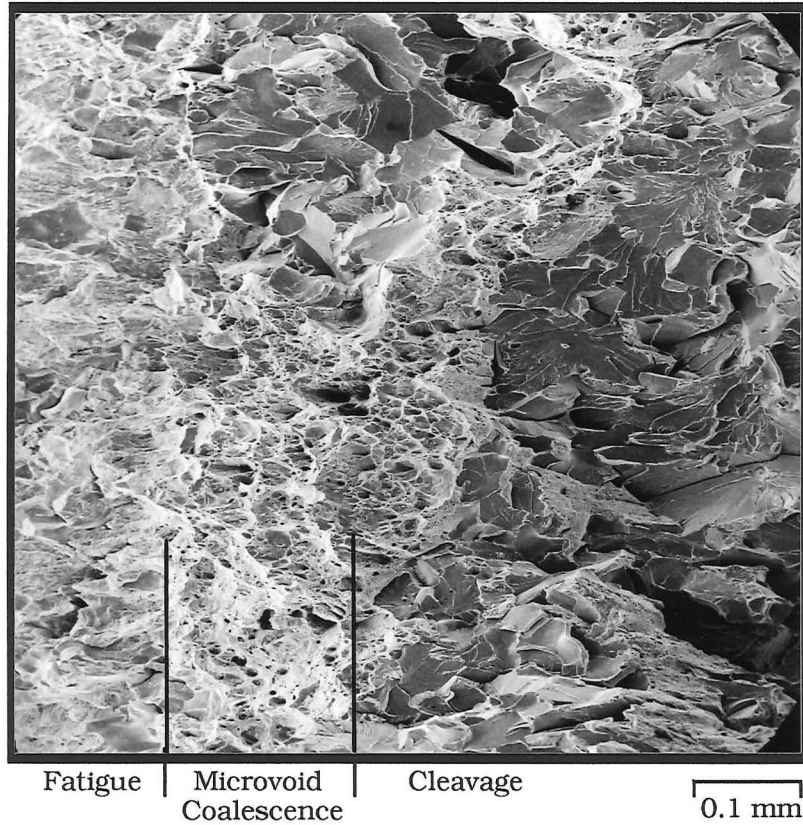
Fracture surface of LC3 tested at -30 °C showing Type II fracture behaviour ( x140, tilt 30° ).
